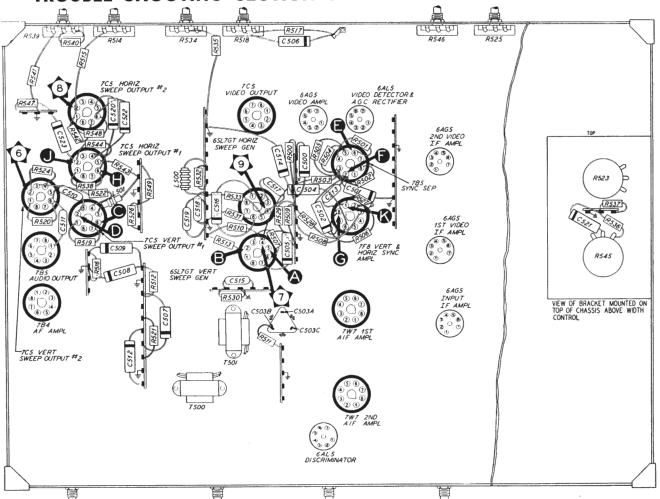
BOTTOM VIEW OF CHASSIS, SHOWING SECTION 5 TEST POINTS.
